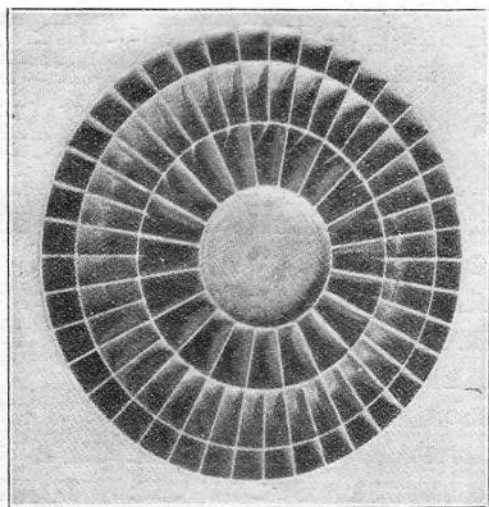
Vane Wheel of One of the Hydraulic Couplings.
